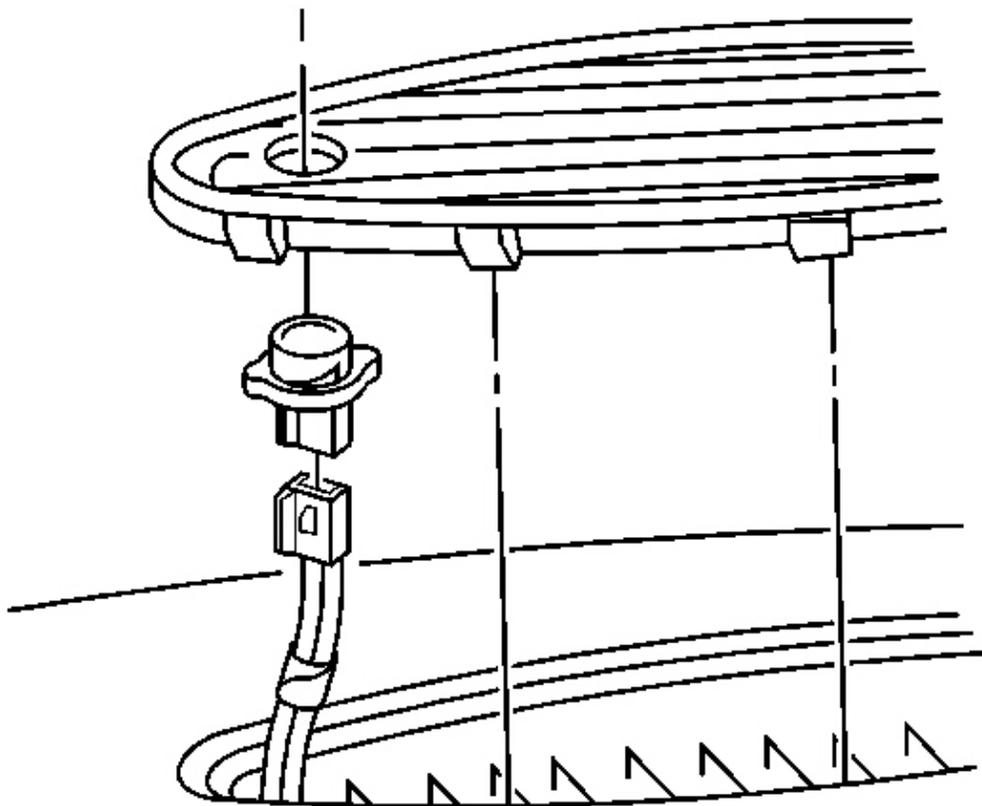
I/P Upper Trim Pad & Windshield Defroster Grille
